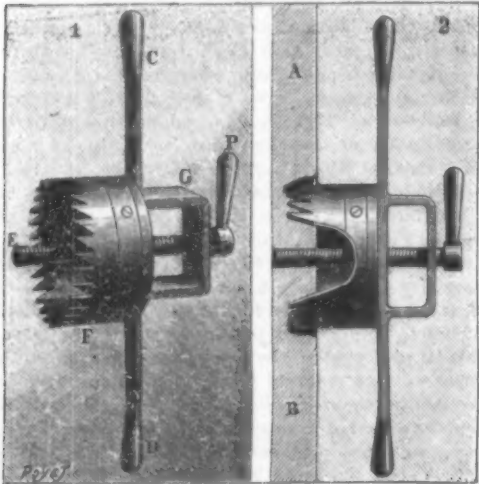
IMPROVED BURGLAR'S DRILL.
